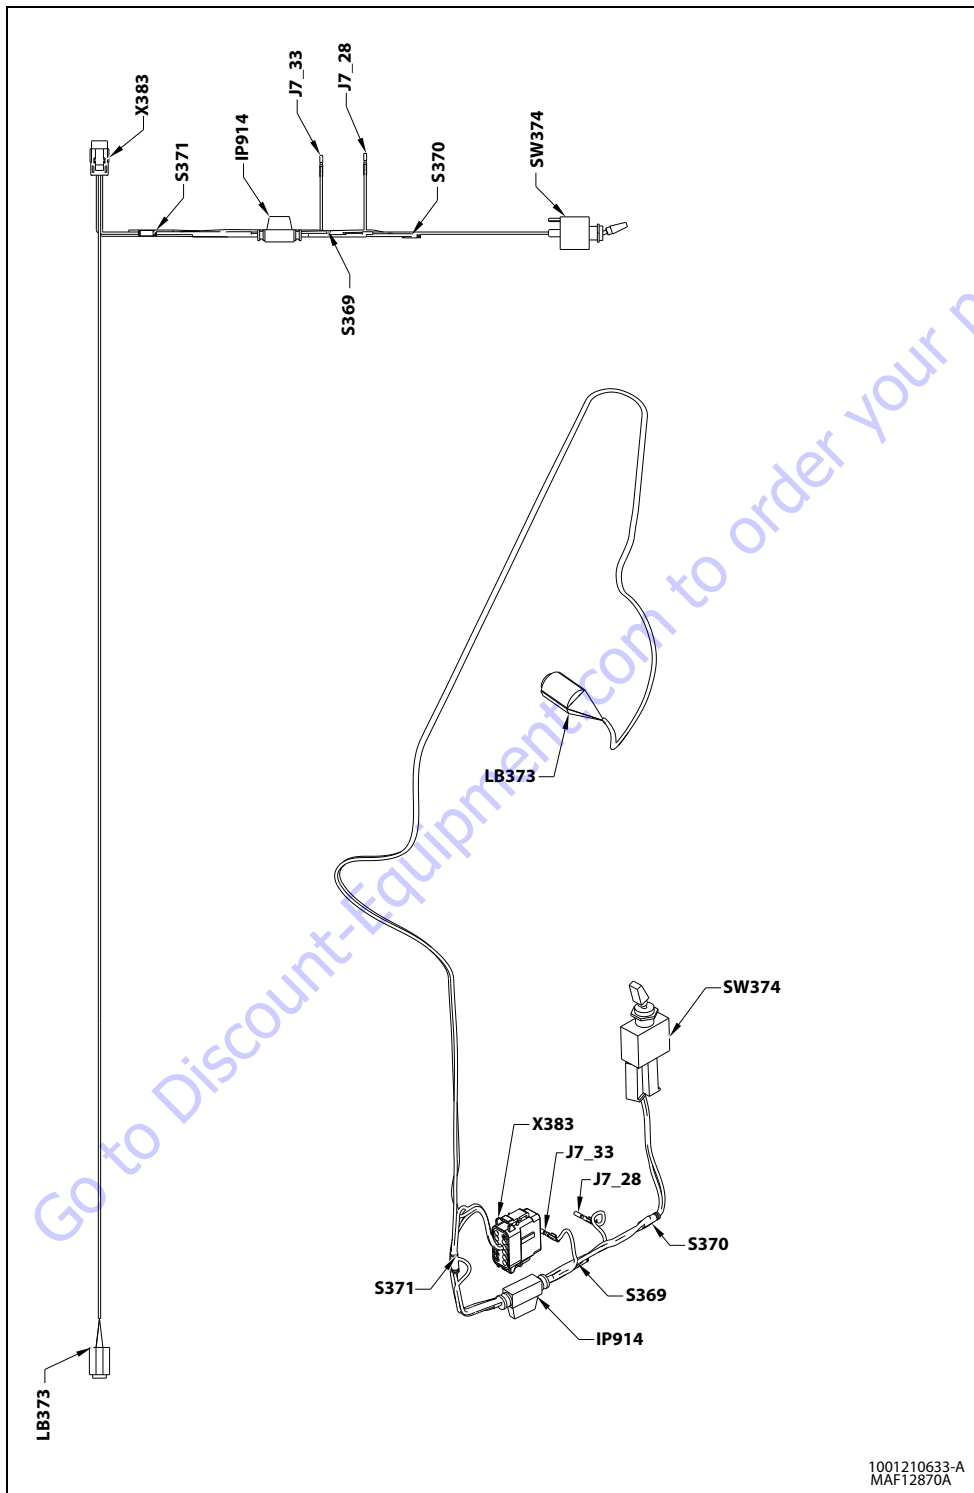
Cribbing Module Harness - Sheet 2 of 2
